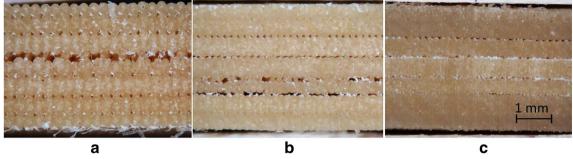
Microscopic cross section of the 3D-printed wood/PLA specimens. Printing layer thickness: a 0.3 mm. b 0.2 mm. c 0.1 mm
